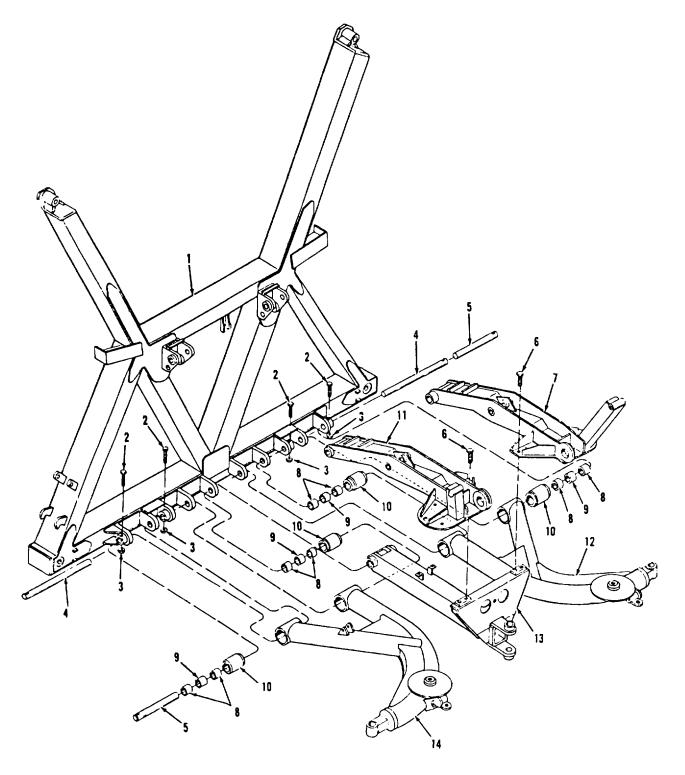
FRONT ADAPTER, CONNECTING LINK, AND UPPER AND LOWER ARM ASSEMBLIES
